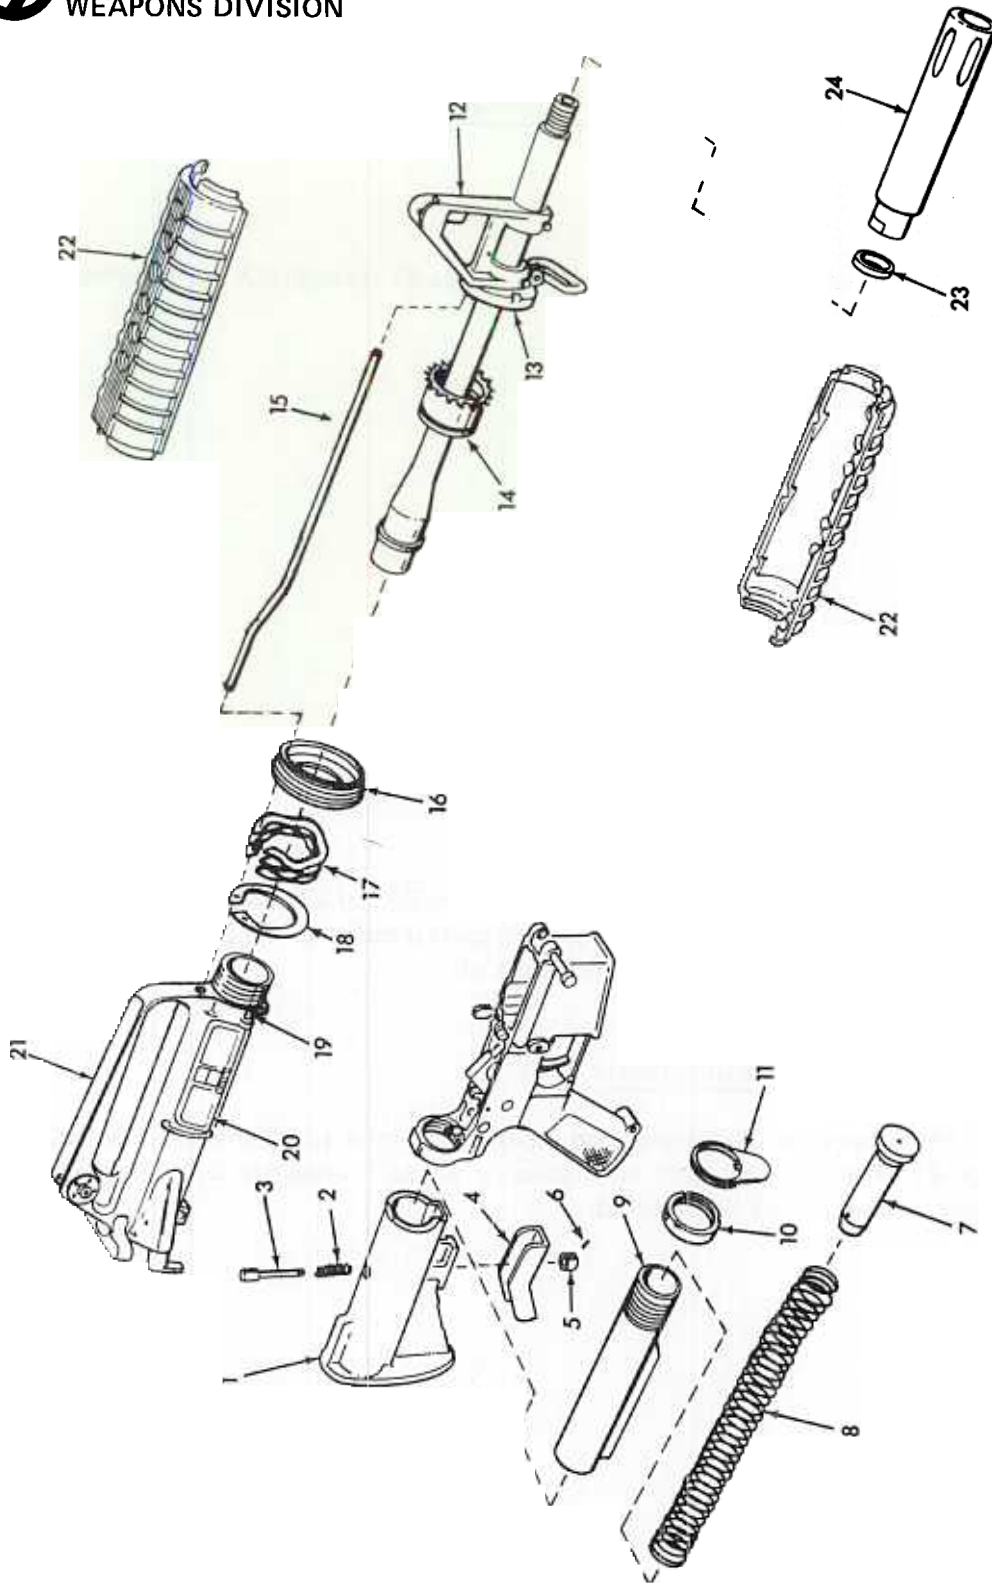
Repair Parts Peculiar to the Commando Submachine Gun.
